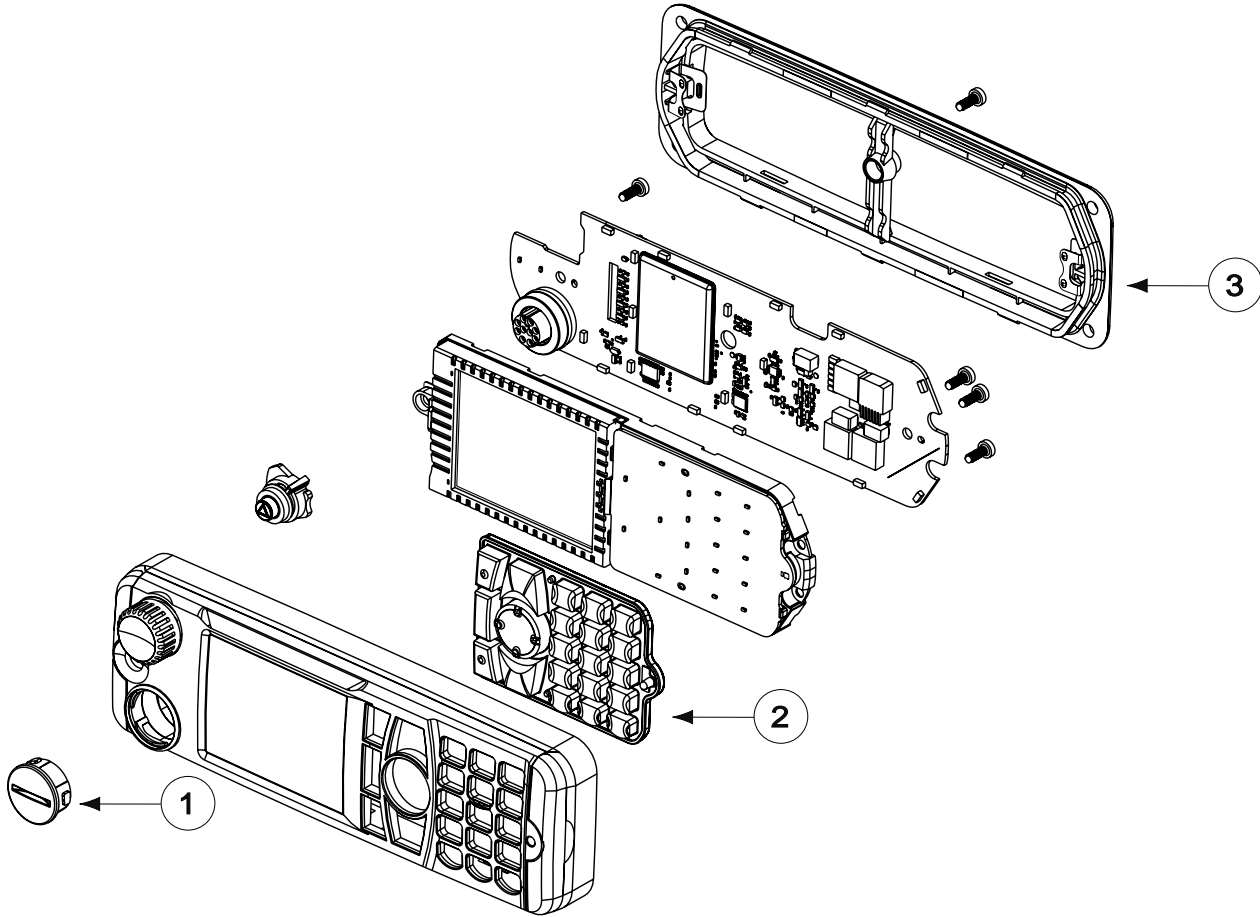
Location of additional UCM Board inside the Cover Plate
